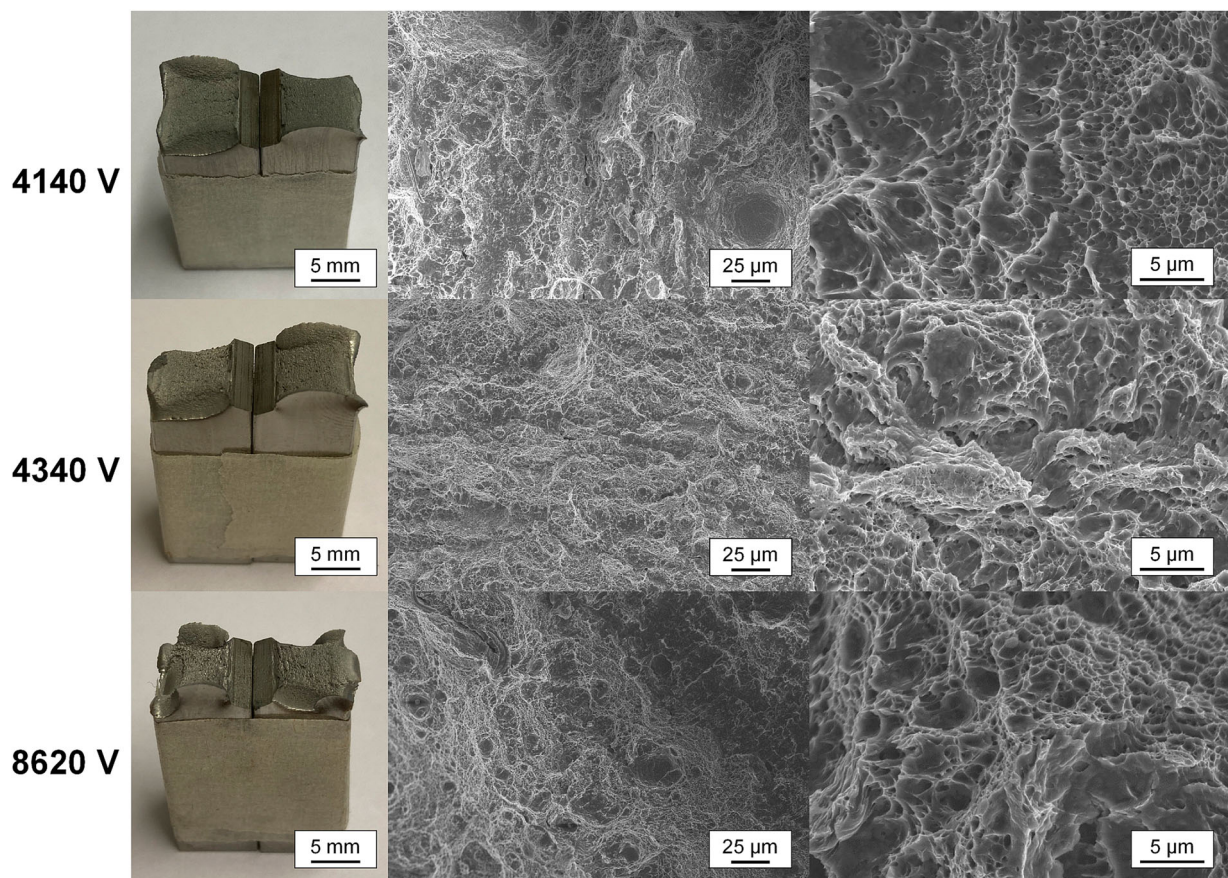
Fracture surfaces from vertical Charpy specimens. SEM images of the fracture surface show magnifications of 1kx and 15kx. Analysis of the fracture surfaces at 1kx revealed a few scattered pores. While analysis at 15kx revealed many fine dimples across the fracture surfaces.
